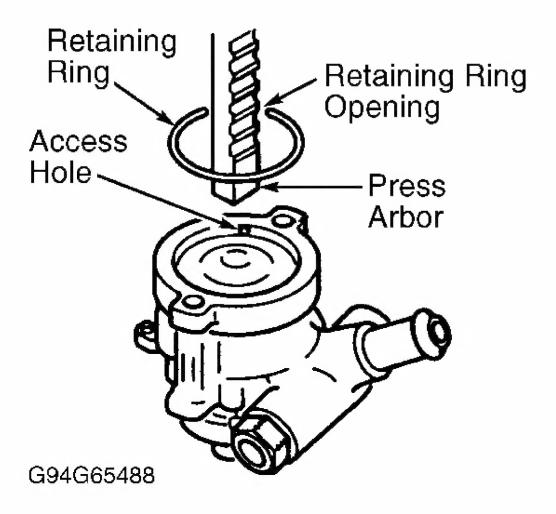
Installing End Cover & Retaining Ring Courtesy of GENERAL MOTORS CORP.
